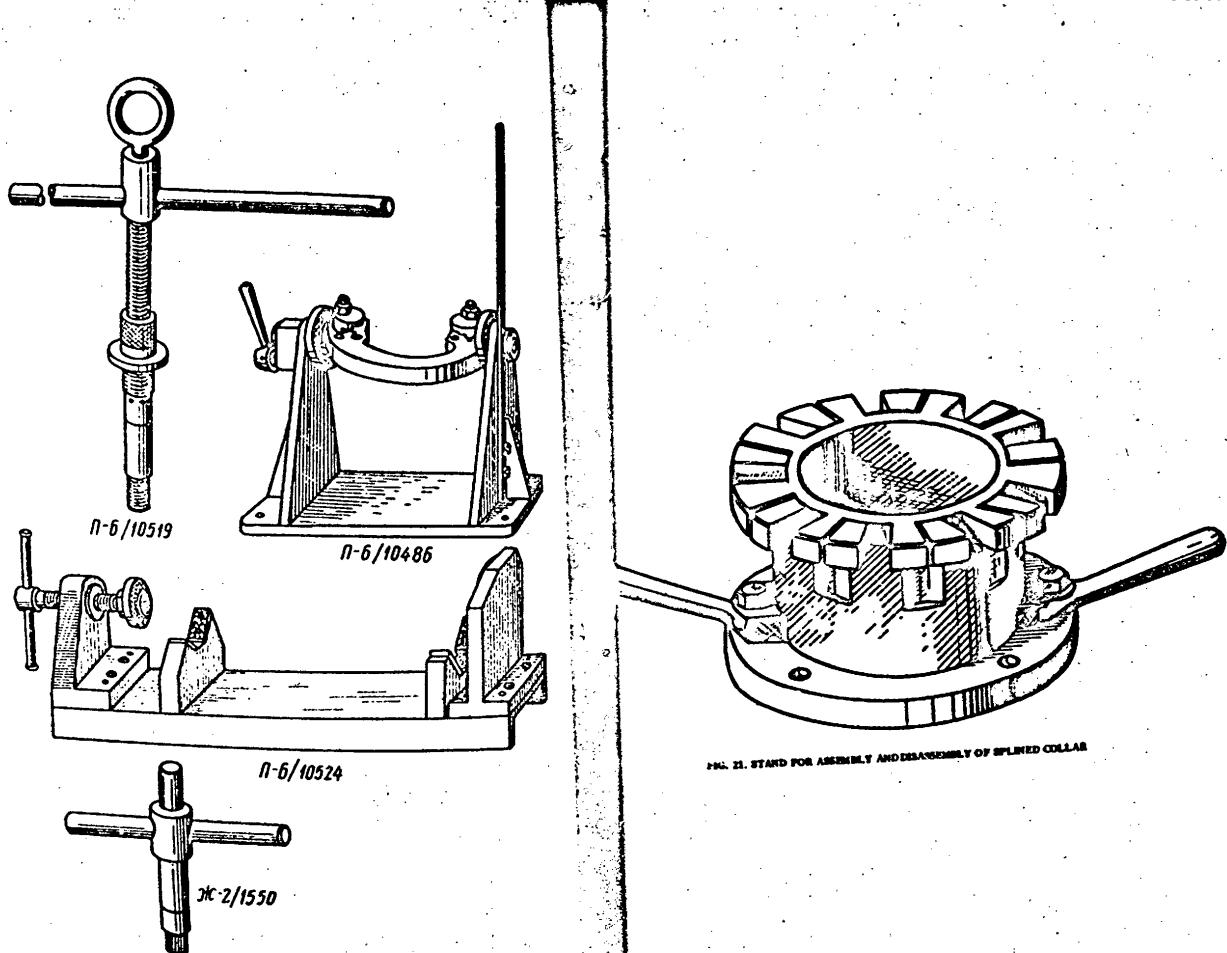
TOOLS AND FIXTURES FOR ASSEMBLY OF CRANKCASE NOSE-PIECE AND CLUTCH
